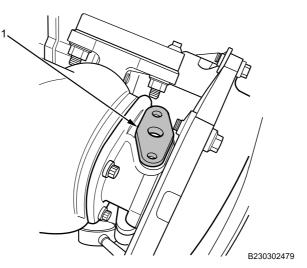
Turbocharger Lubricant Supply Line Flange Gasket.
